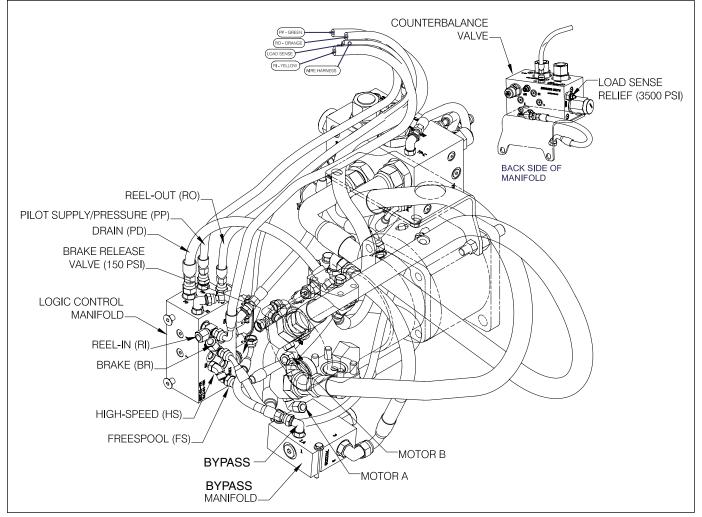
Hydraulic Pressure Test Ports S/N H6G-1021 and above (some items removed for clarity)
